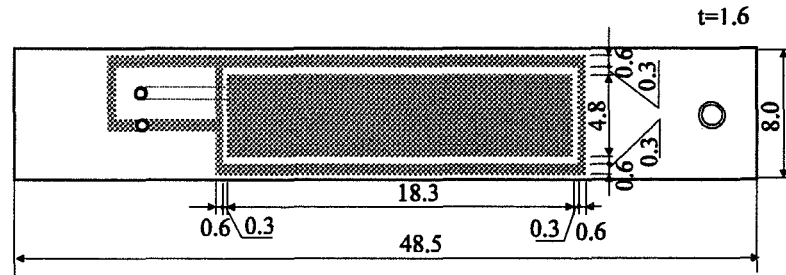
Detail geometric dimensions in mm of the gap sensor plate.
